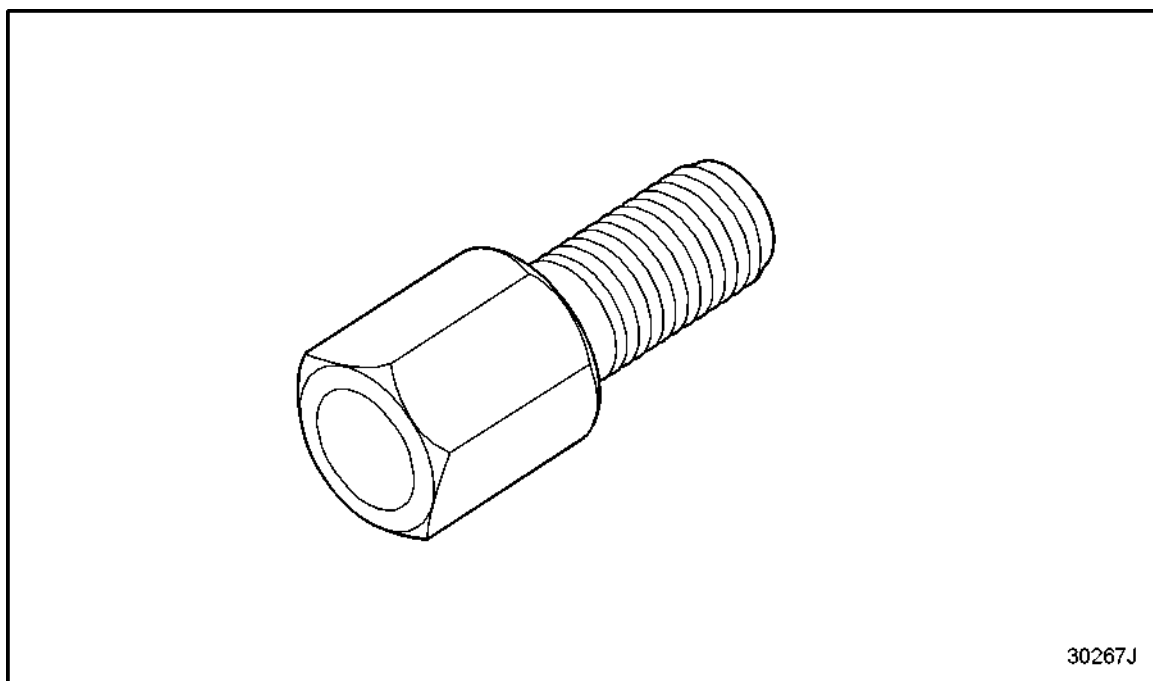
Nozzle Sleeve Remover,J 39262
